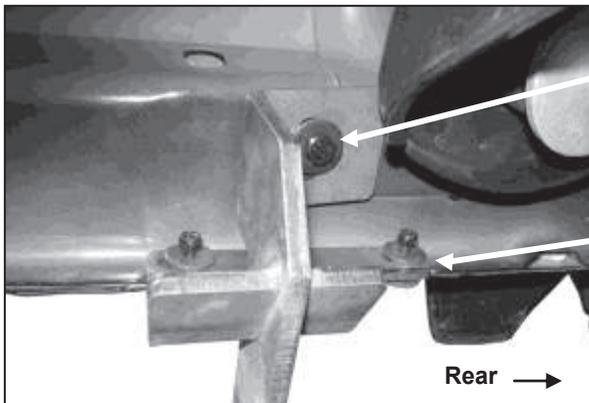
8mm threaded hole in floor frame channel (passenger side-front pictured for example)
